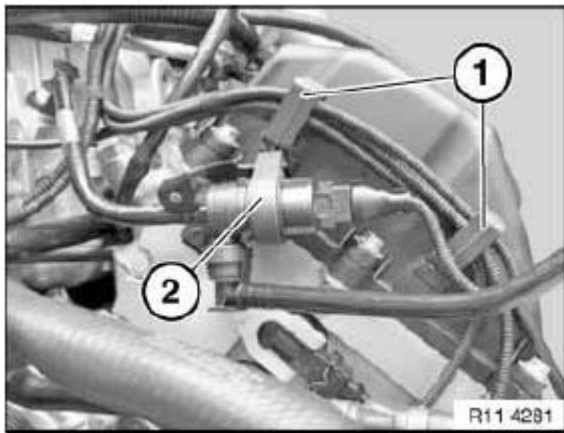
Identifying Tank Venting Valve And Cable Holder
